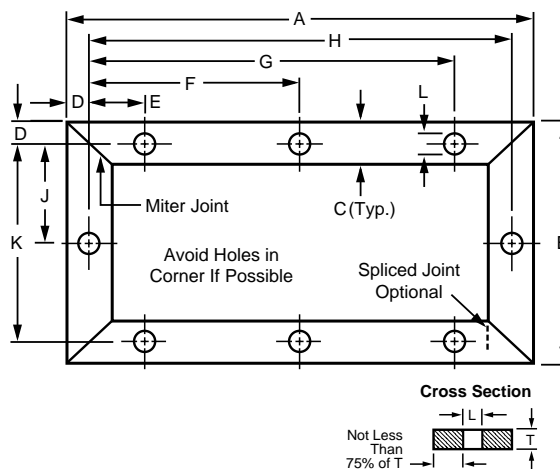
Dimensions and Tolerances for POLASTRIP and COMBOPOLASTRIP Fabricated Gaskets
